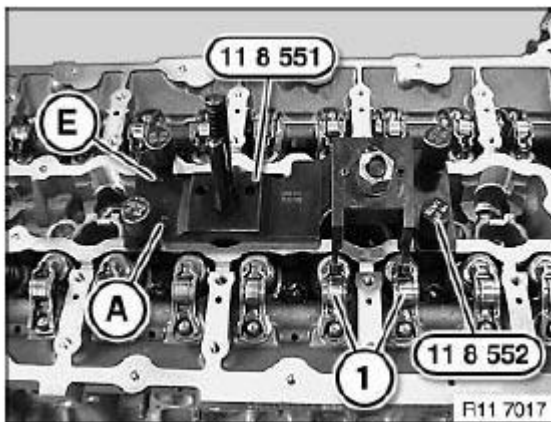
Identifying Special Tools 11 8 551 And 11 8 552
